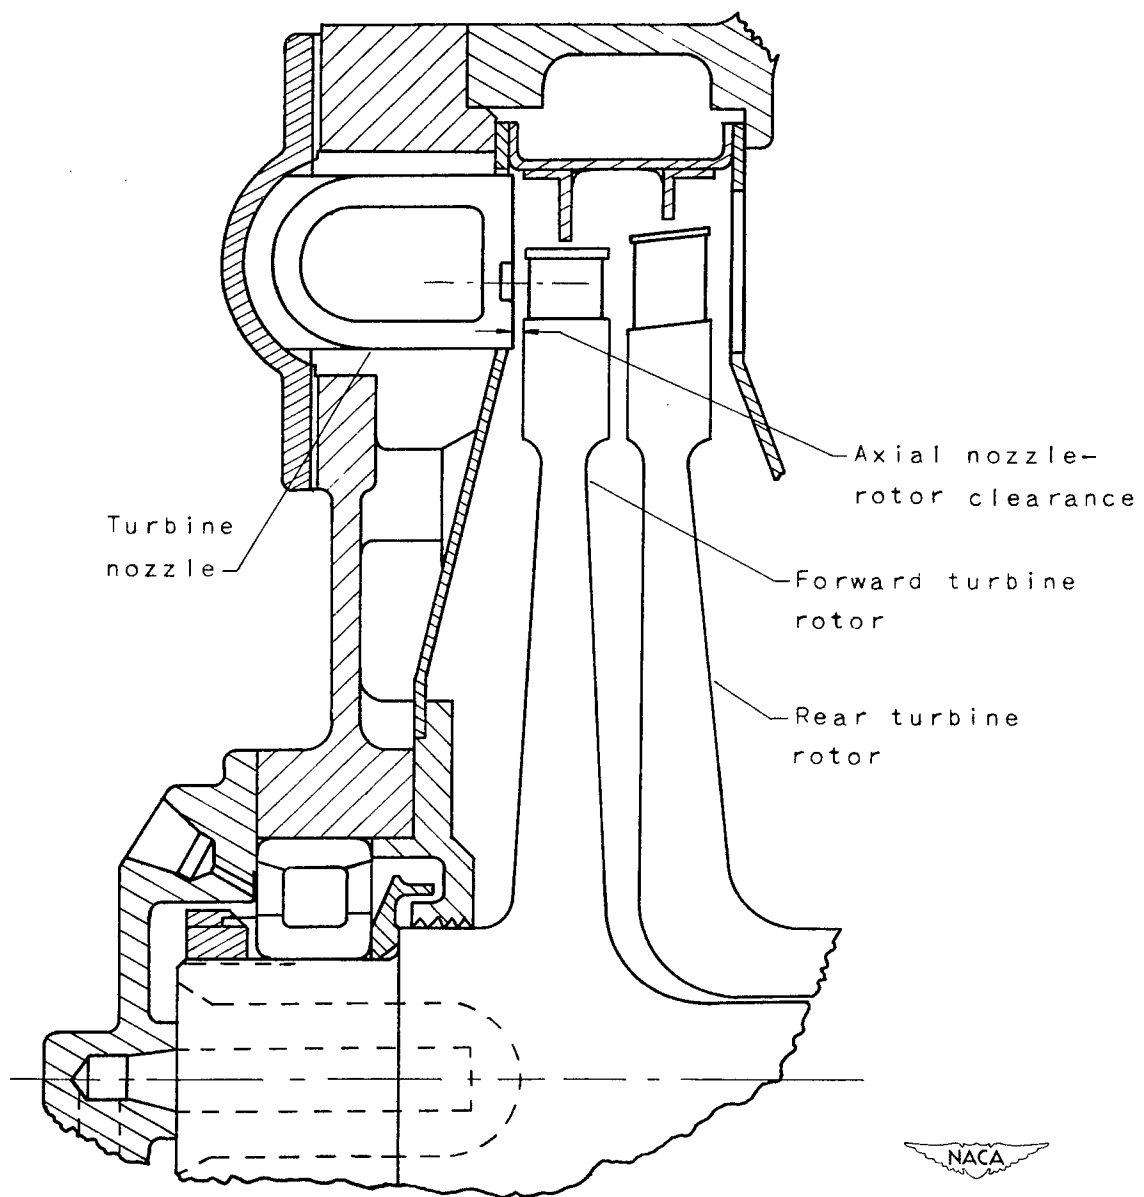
Nozzle and-turbine-rotor assembly for Mark 25 aerial-torpedo power plant.
